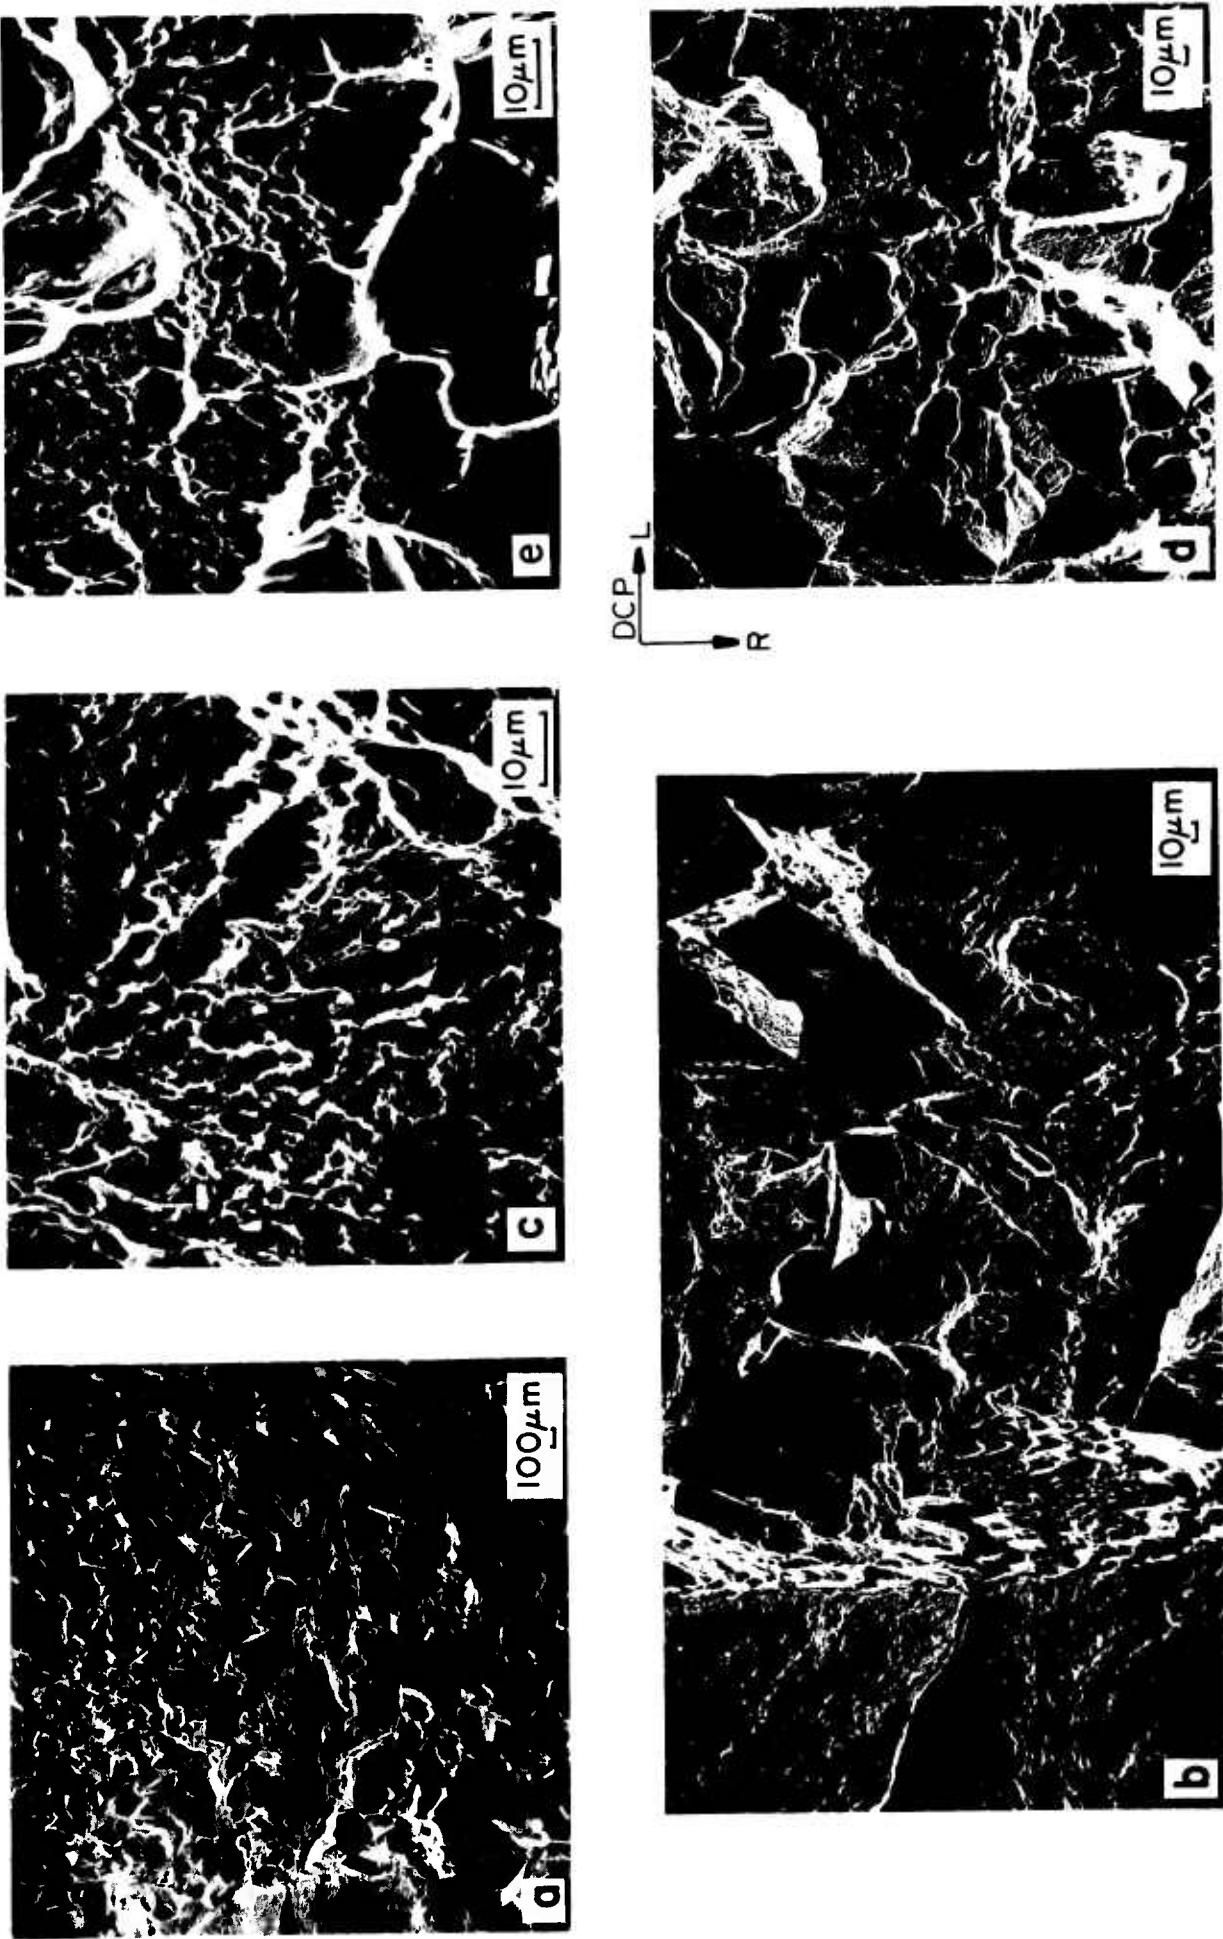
Alloy 227, sample 7MSL4. SEM of fracture surface (a) X25, (b) X250 - precrack / fast fracture transition, (c) X900 - fast fracture close to transition, (d) X250, (e) X900 - fast fracture.
